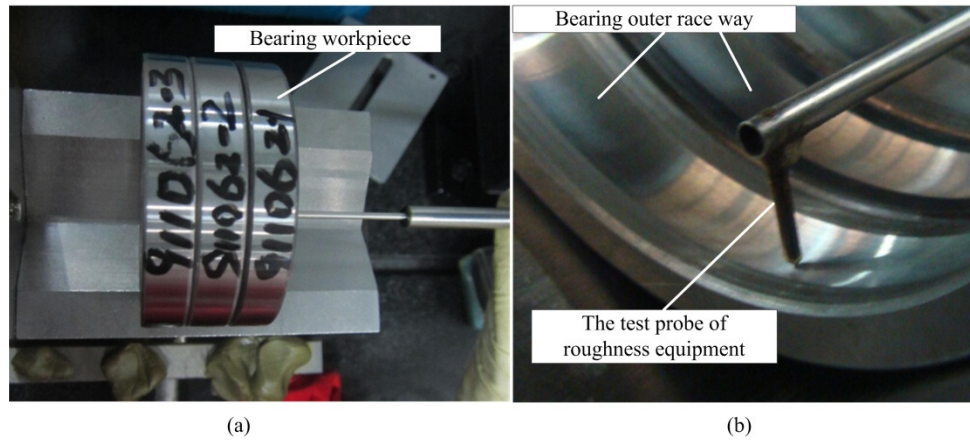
Roughness measurement: (a) three bearing workpieces and (b) measurement process
